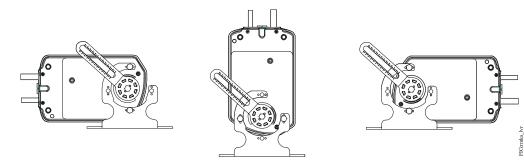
M9208-250 Remote Mounting Kit with Actuator, Horizontal Left, Vertical, and Horizontal Right
